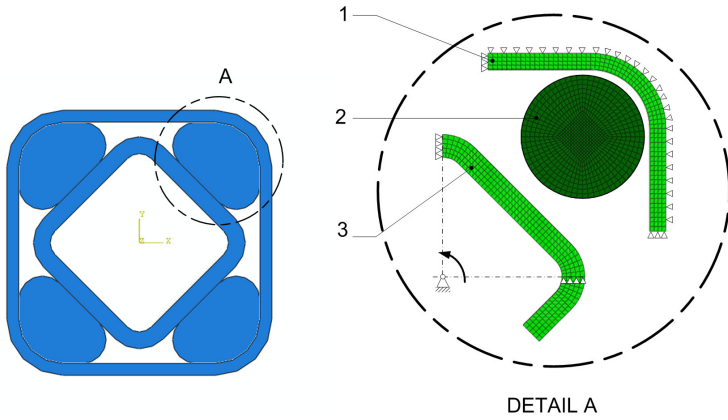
Assembled rubber suspension unit with housing (1), string (2), and shaft (3).
